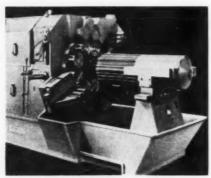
Model 98. Multiple spindle automatic work rotating chucking machine with flat cross slides. Additional forming arms can be attached in the openings which are now covered by circular covers at the top of the machine. Note extremely wide open and accessible tooling area which is one of the advantages of the open-end chucking machine.
